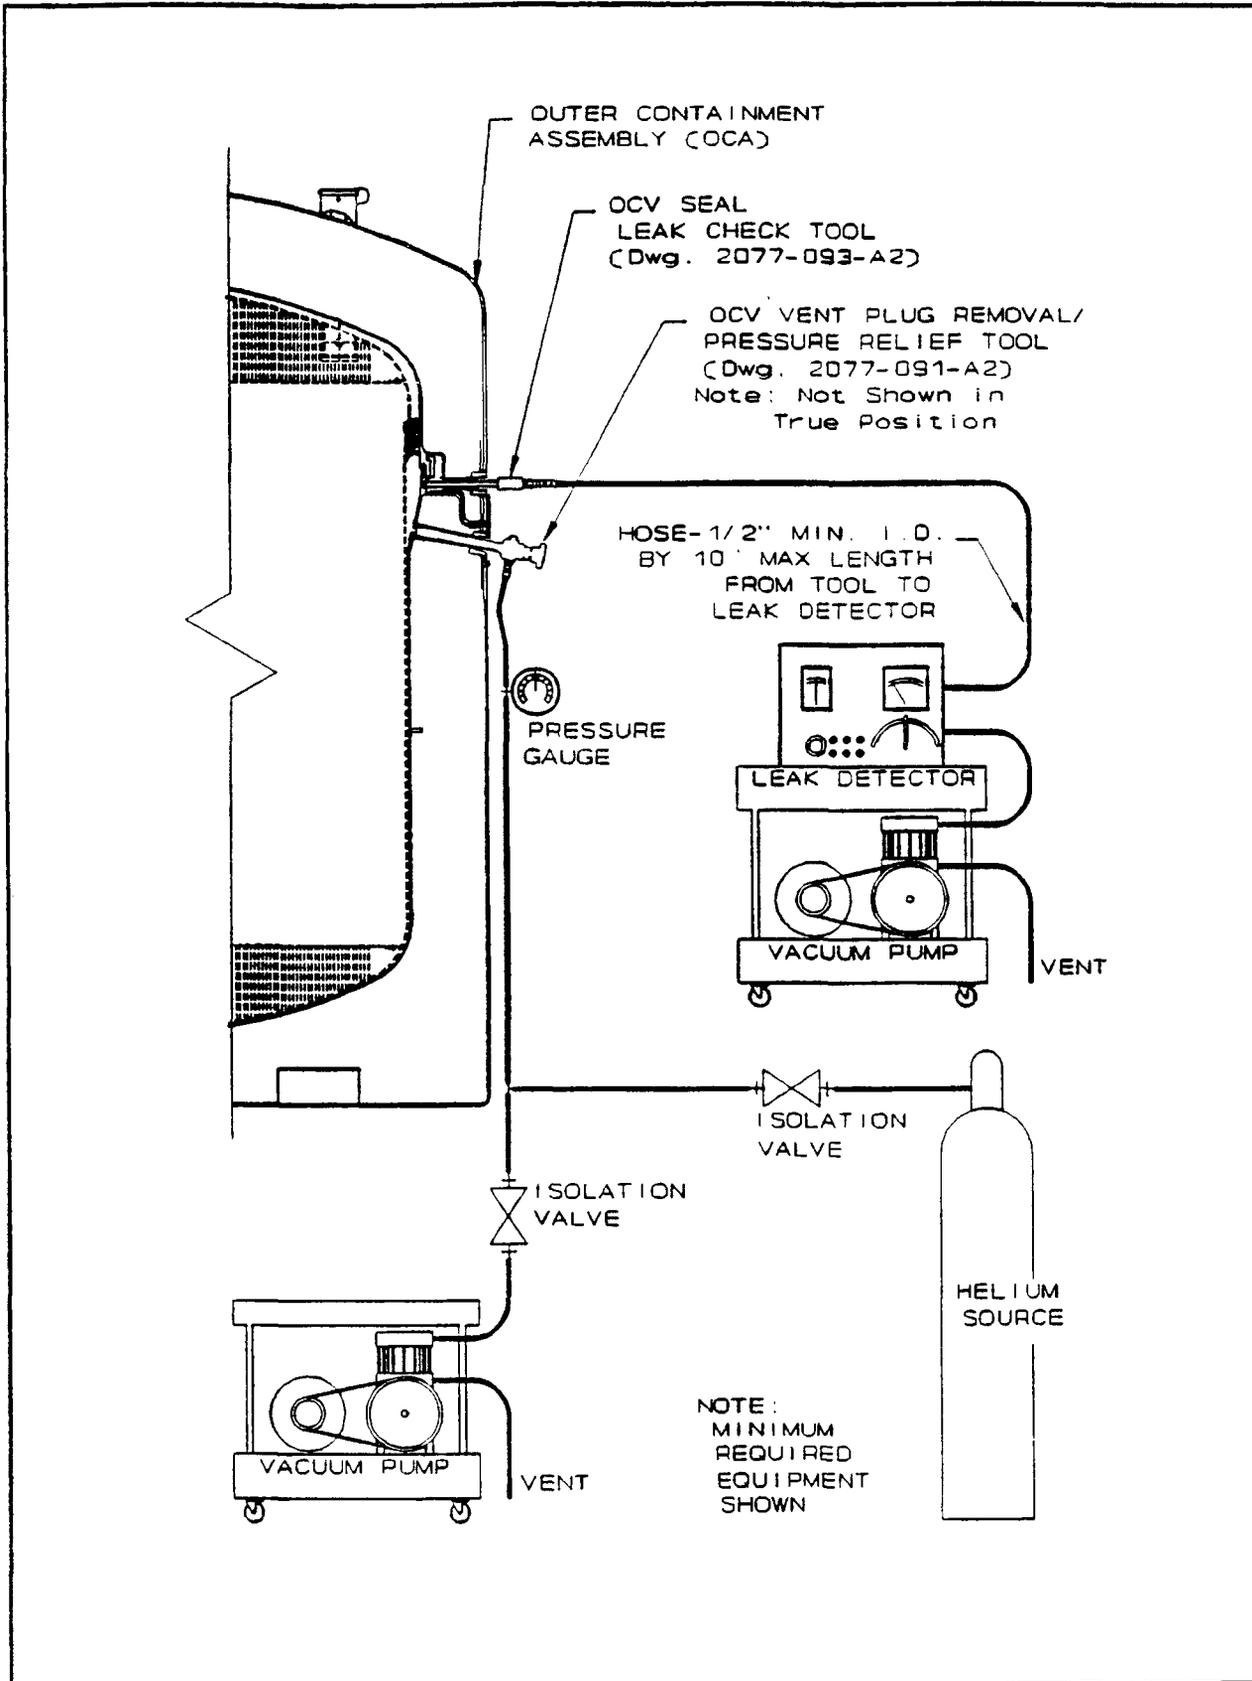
O-ring Seal Leak Test Setup Support Arrangement for Assembled OCV
